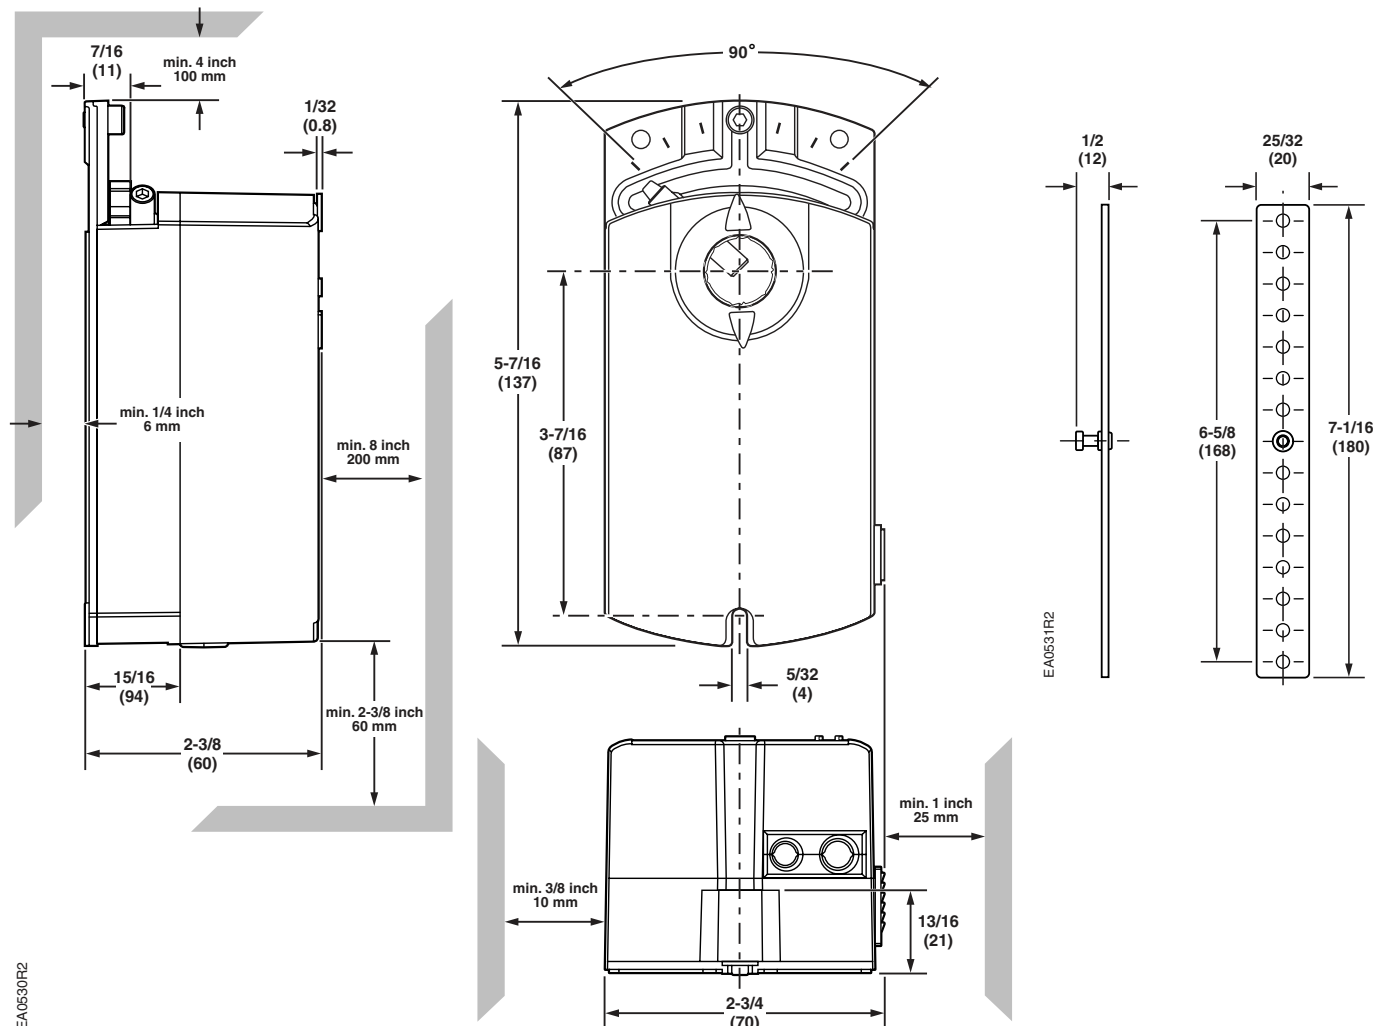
Dimensions of the DuraDrive Actuator and Anti-rotation Bracket.
